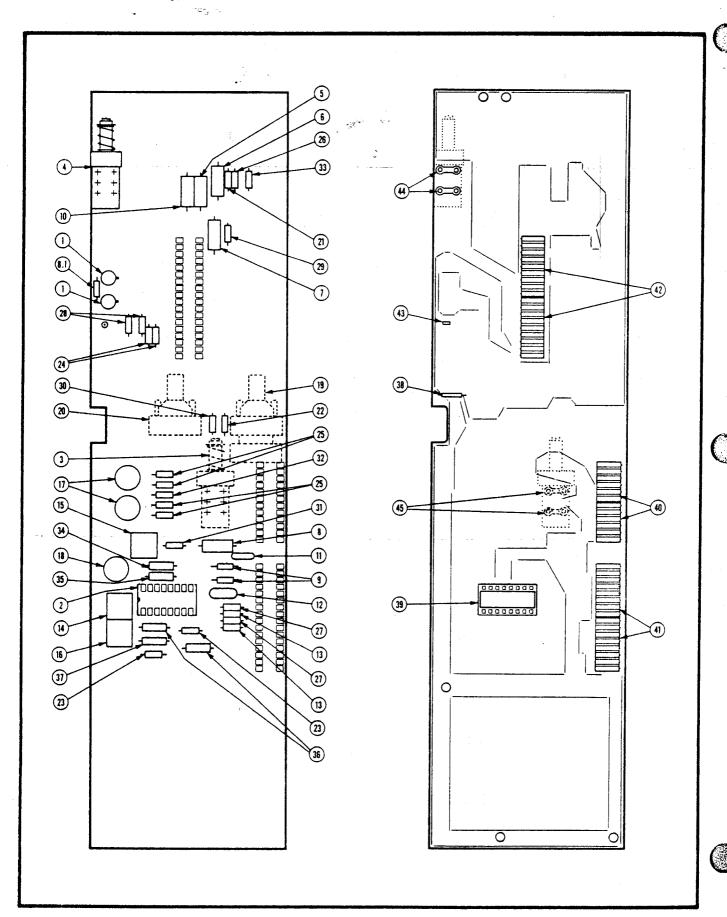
A6 Circuit Board Assembly, Horizontal.
